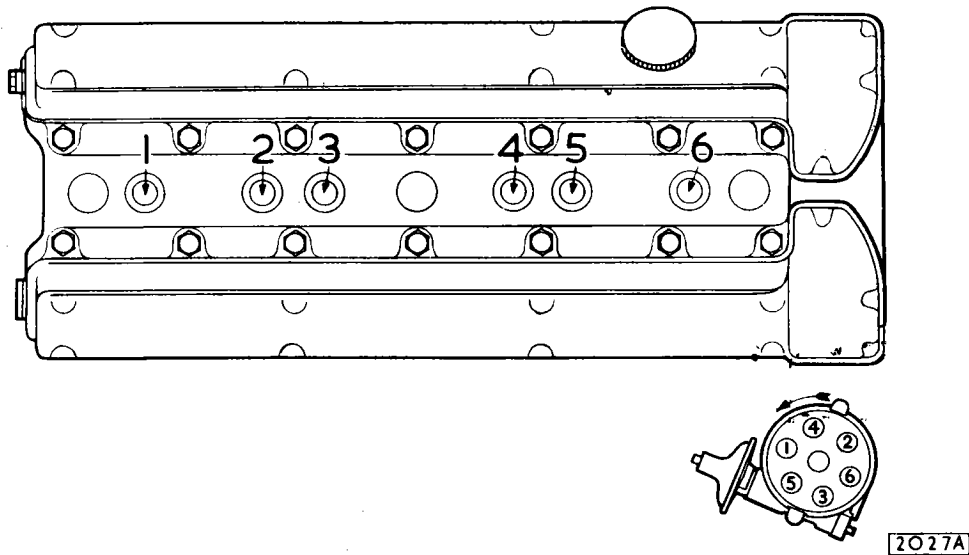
View of the engine showing the firing order and cylinder numbers.
